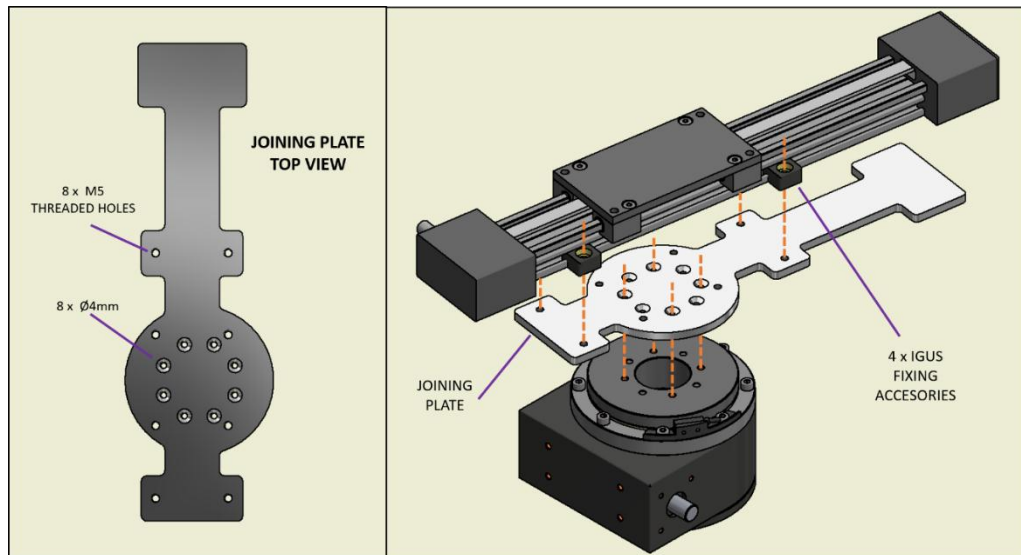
Silhouette of the joining plate and how it assembles the X axis to the base of the robot.
